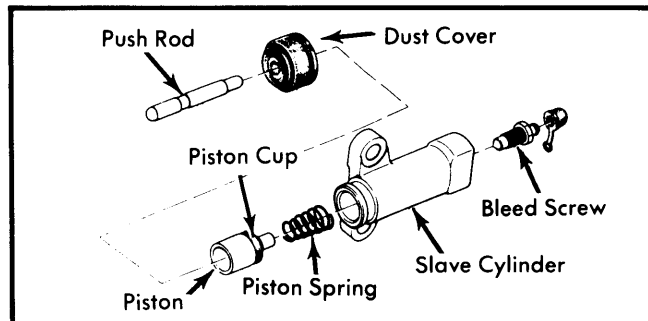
Exploded View of Clutch Slave Cylinder Assembly (Except 210)
